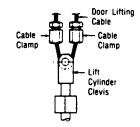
CONNECTING DOOR LIFTING CABLE.
